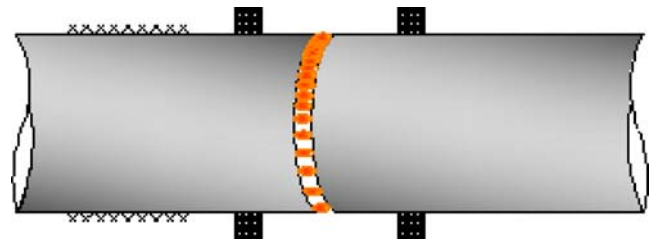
Magnetically impelled arc butt welding—phase 4
